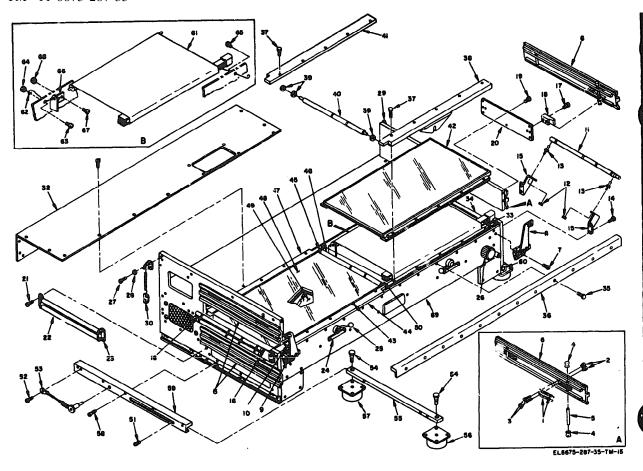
3). Disassembly of Z-travel carriage, exploded view (part 3 of 3).
